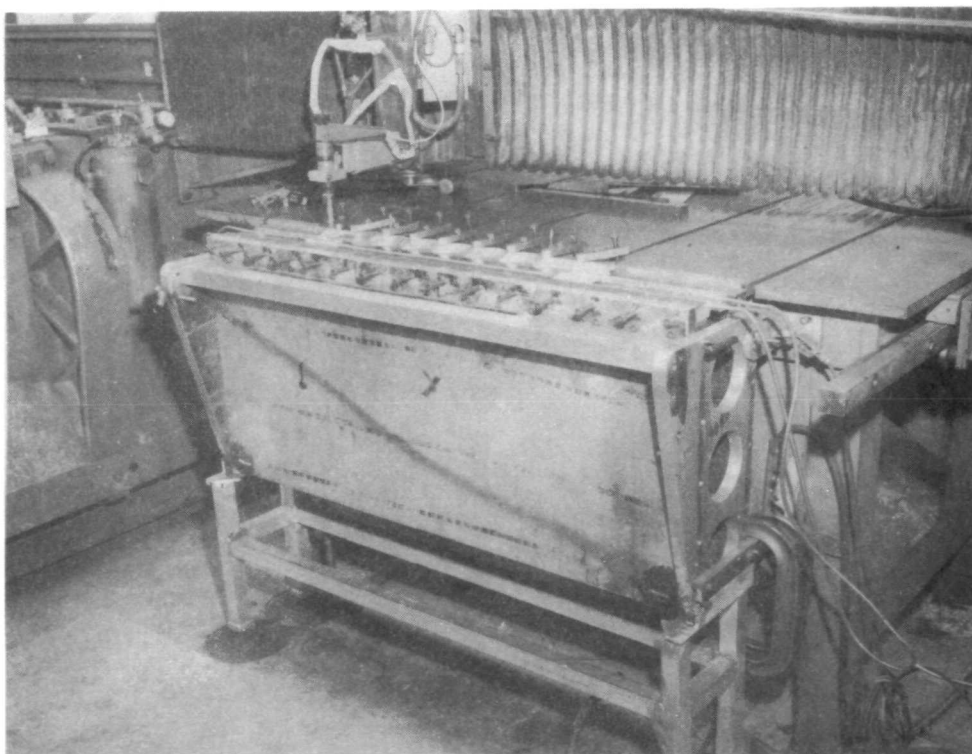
Master Weld Fixture for Rib Spar Assemblies Shown Ready to Weld
